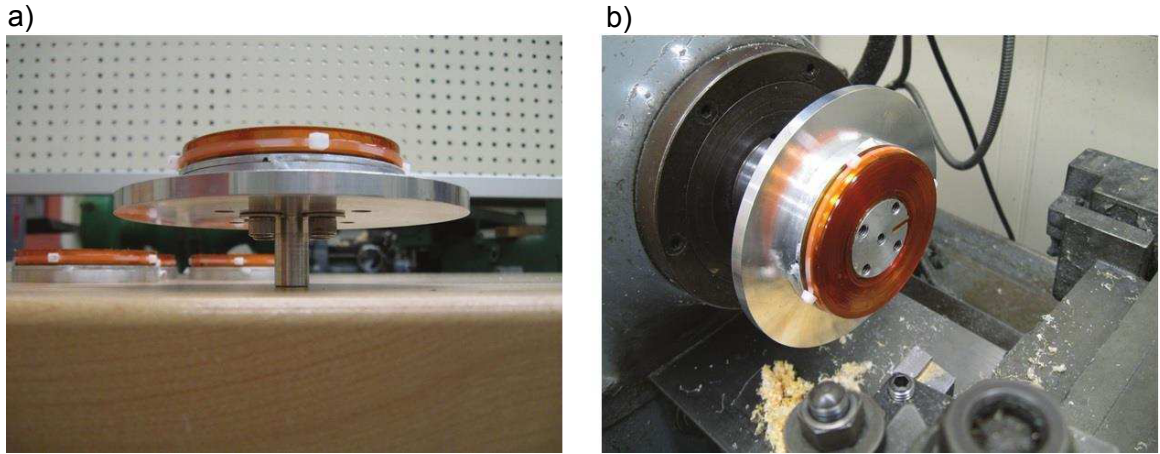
a) Transport coil mounted on lathing form. The cable tie was attached to keep the coil from unwinding while the machinable epoxy (Stycast 1266) cured. Each winding form is designed to adapt onto the lathing form for machining. b) We lathed off the excess Kapton on both the front and back surfaces to achieve a smooth finish for better thermal contact between surfaces.
